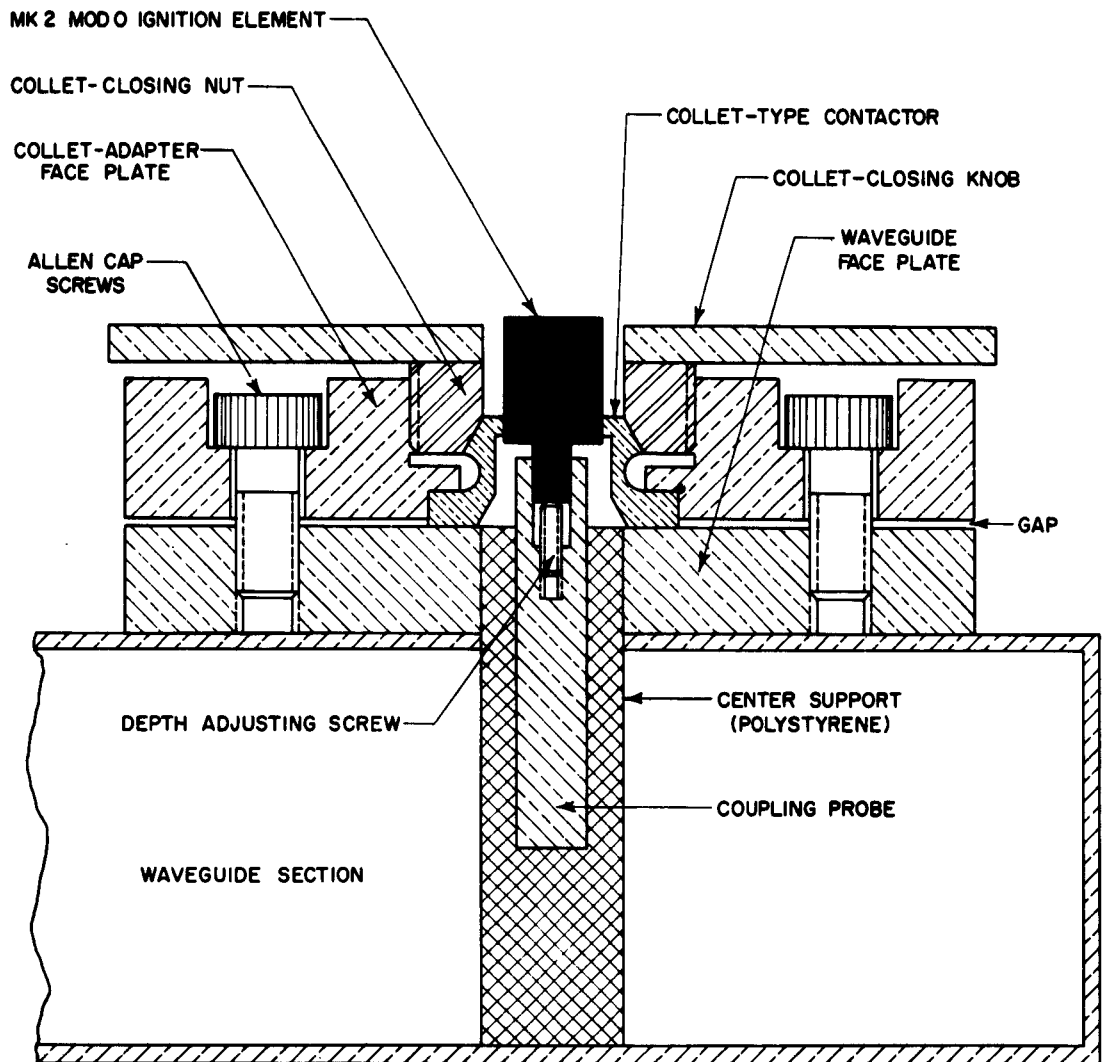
CROSS SECTION OF FIRING MOUNT
